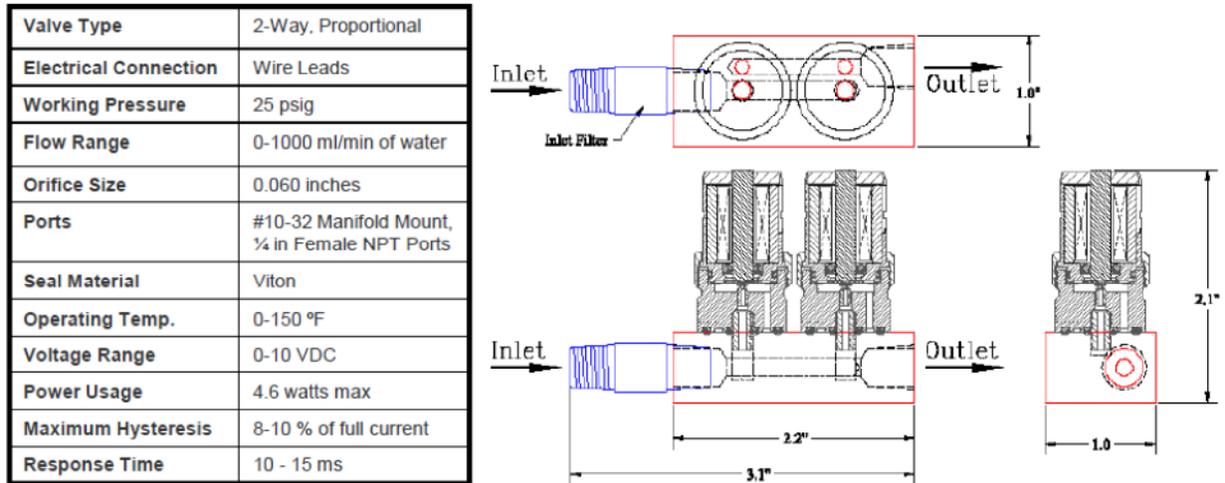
Proportional valve assembly characteristics and overall dimensions.
